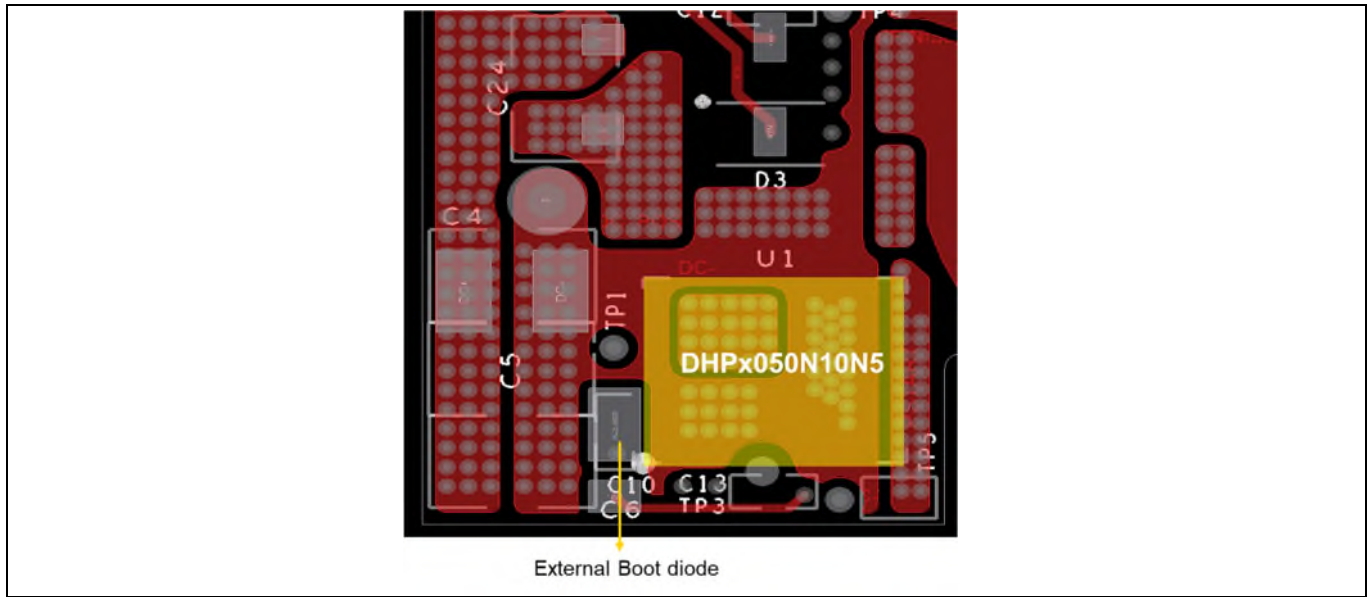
Example layout of DHPx050N10N5 in the primary side of a FB-FB ¼ brick board – Bottom Layer
